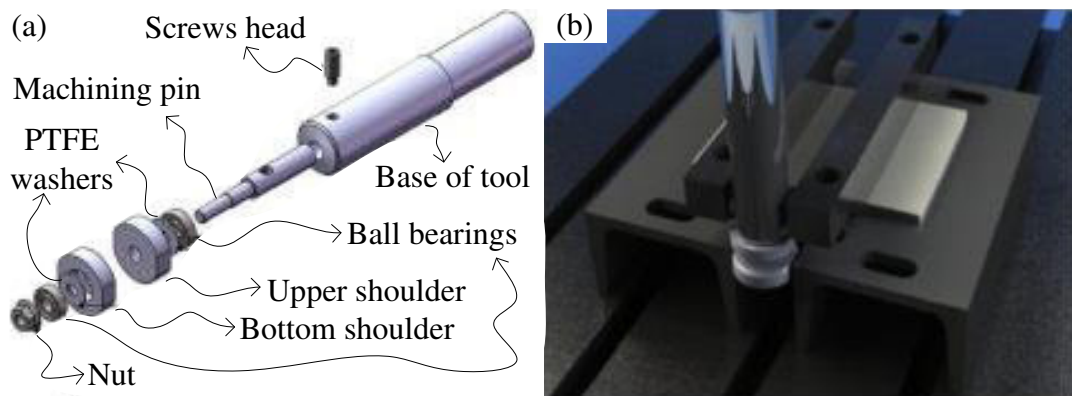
Self-reacting tool: (a) disassembled tool; (b) tool in-operation (Source: (Pirizadeh et al., 2014)).
